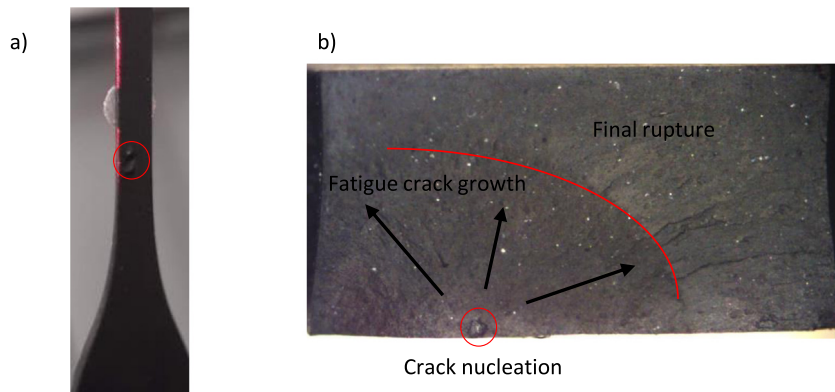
Fatigue uniaxial tensile test: Crack nucleation (a) and final fracture surface (b). The crack initially formed at the largest inclusion.
